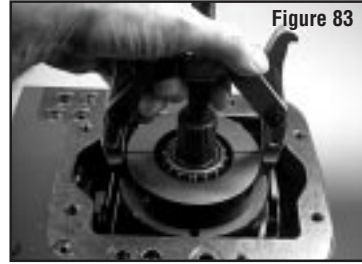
VERY CAREFULLY pick up the entire assembly and install it into the pump housing. Install by aligning the two notches located in the swashplate with the two clocking links and the swashplate side with the notch in the servo piston. IMPORTANT: The swashplate assembly must be firmly seated on the swashplate bearings. (see Figure 83)
